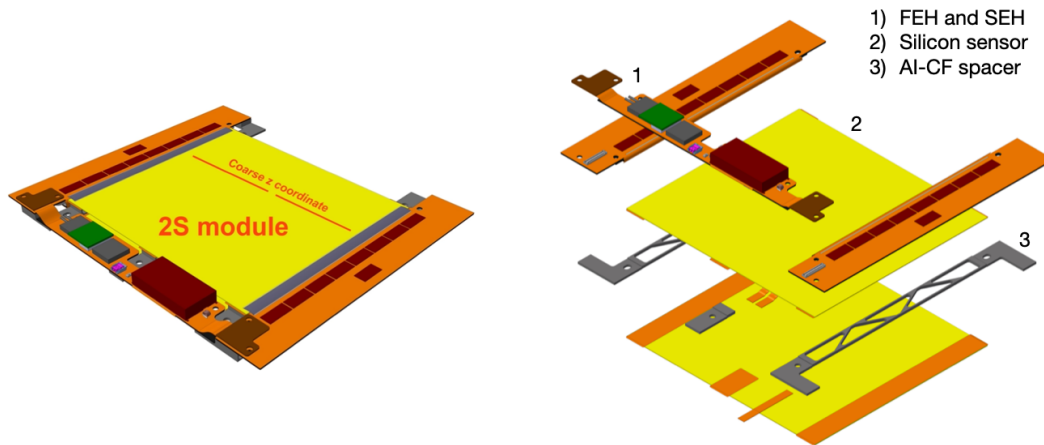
CAD drawings of an assembled (left) 2S module and an exploded view (right). In the exploded view, its main components are highlighted. Modified from Ref. [5].
